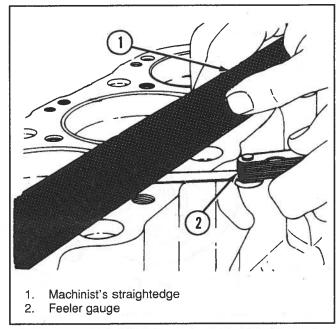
Checking Engine-Block Head-Gasket Deck For Flatness
